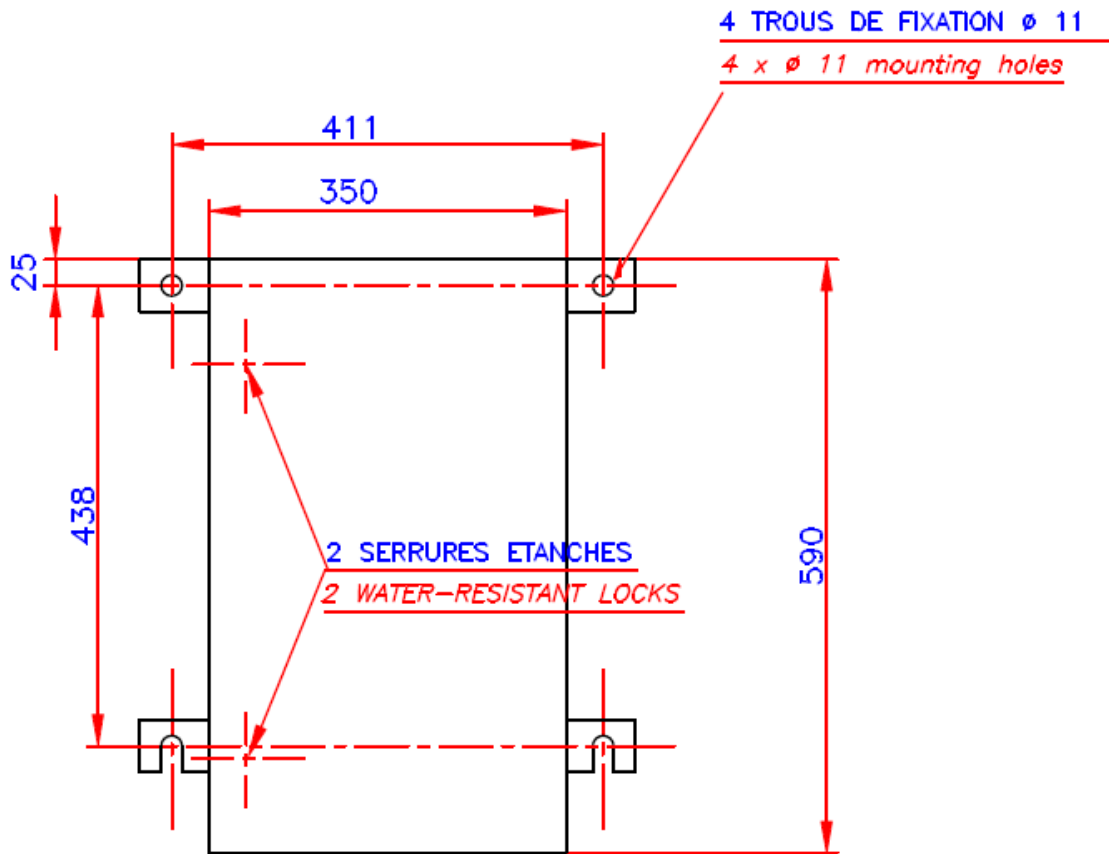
OUTLINE AND MOUNTING DIMENSIONS OBSTAFLASH HI POWER SUPPLY.
